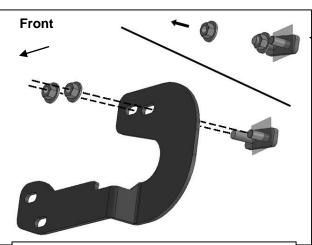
On 2017-19 models only, attach driver/left Frame Bracket to Spacer and bumper. Do not install Bracket without Spacer on 2017-19 model years
